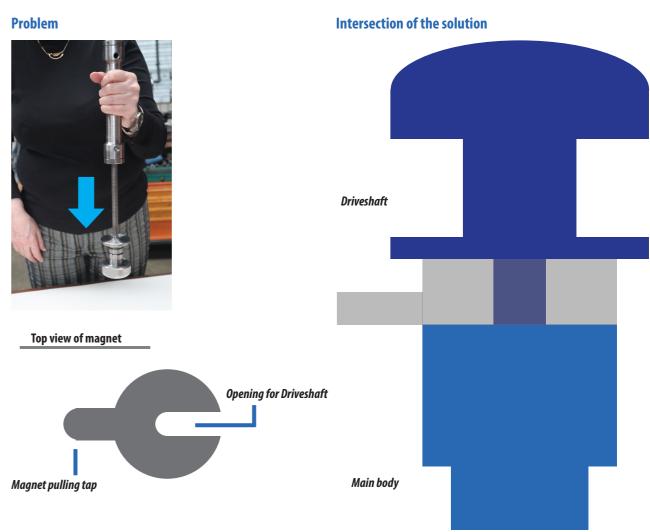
Magnet used to stop rod from moving outwards; Magnet is placed inbetween main body and Drive shaft
